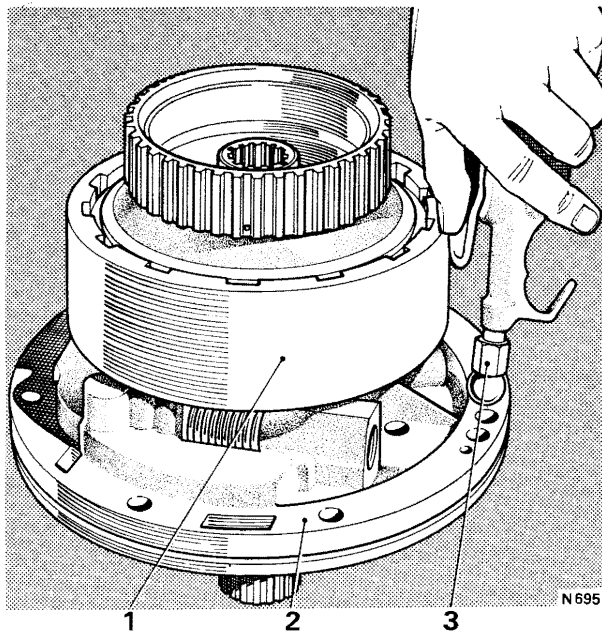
AIR TESTING THE FORWARD CLUTCH
